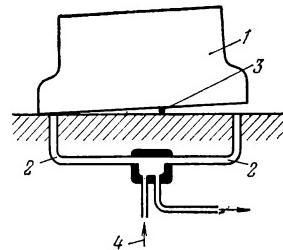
Checking for proper location of a cylinder block by means of a pneumatic pickup:
